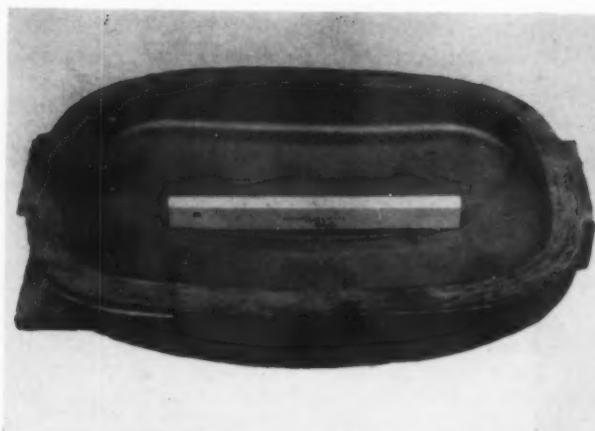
300-lb, 14% Cr-steel mold for face of 21-in. television tube.
